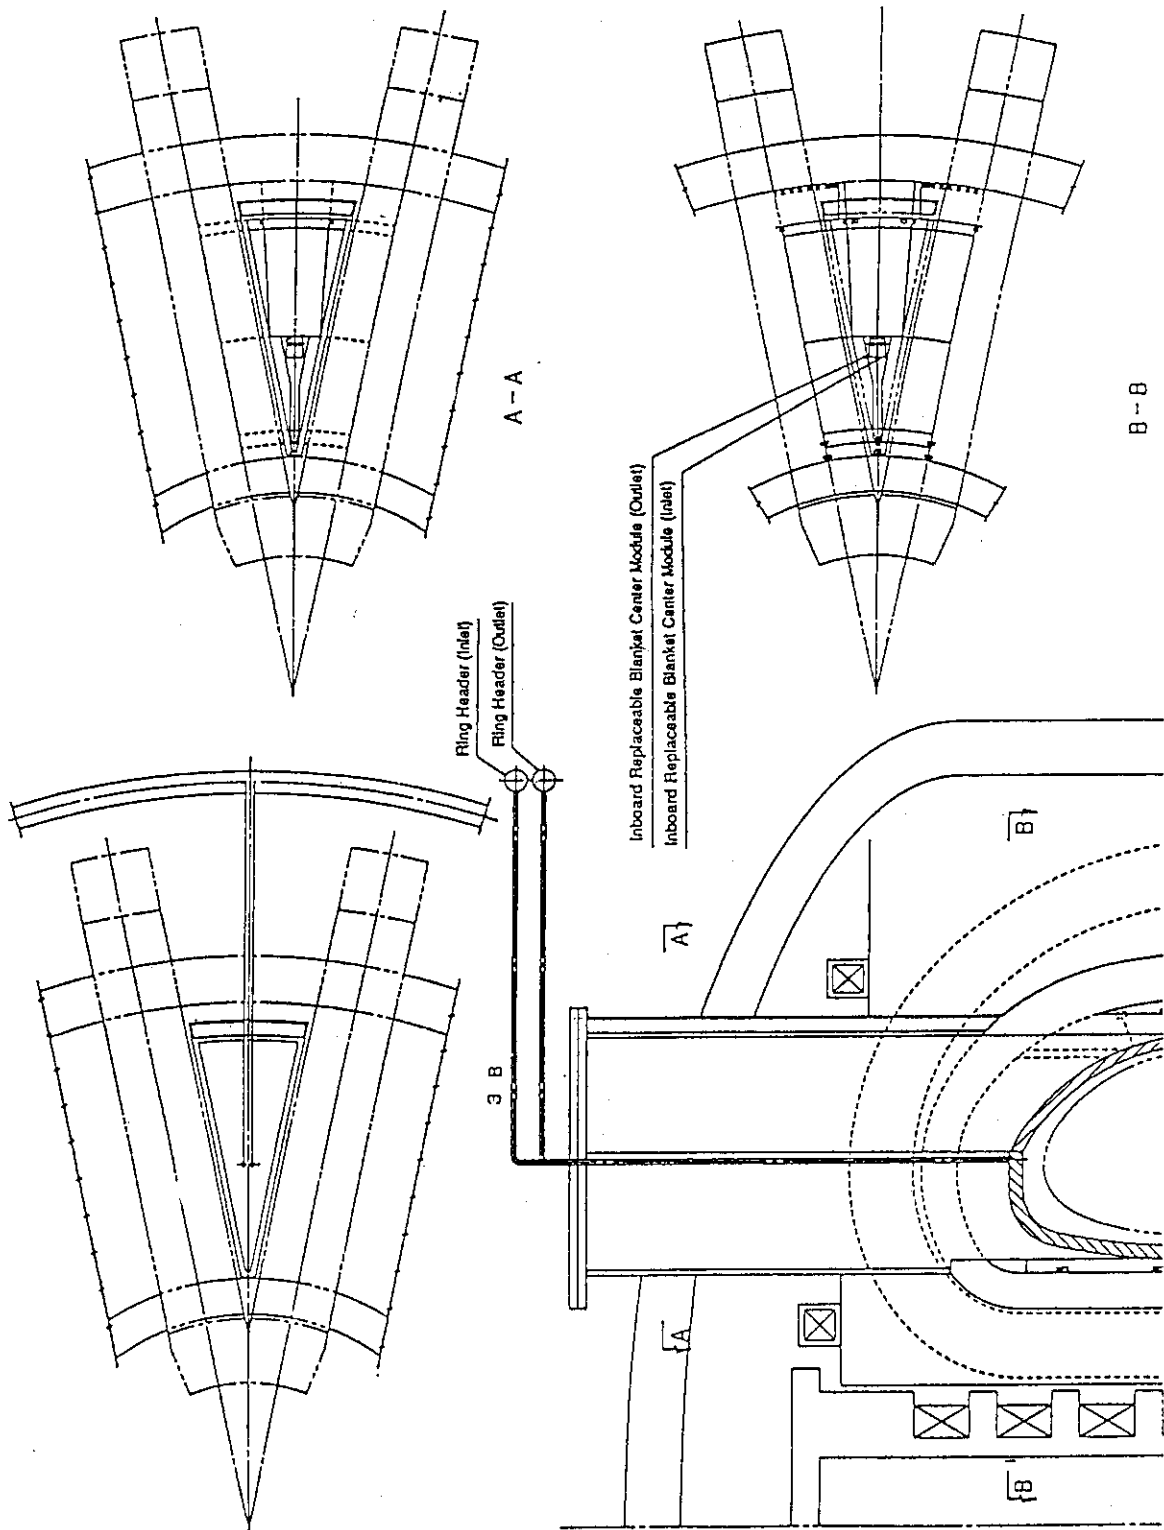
Coolant pipe arrangement for inboard replaceable center module.
